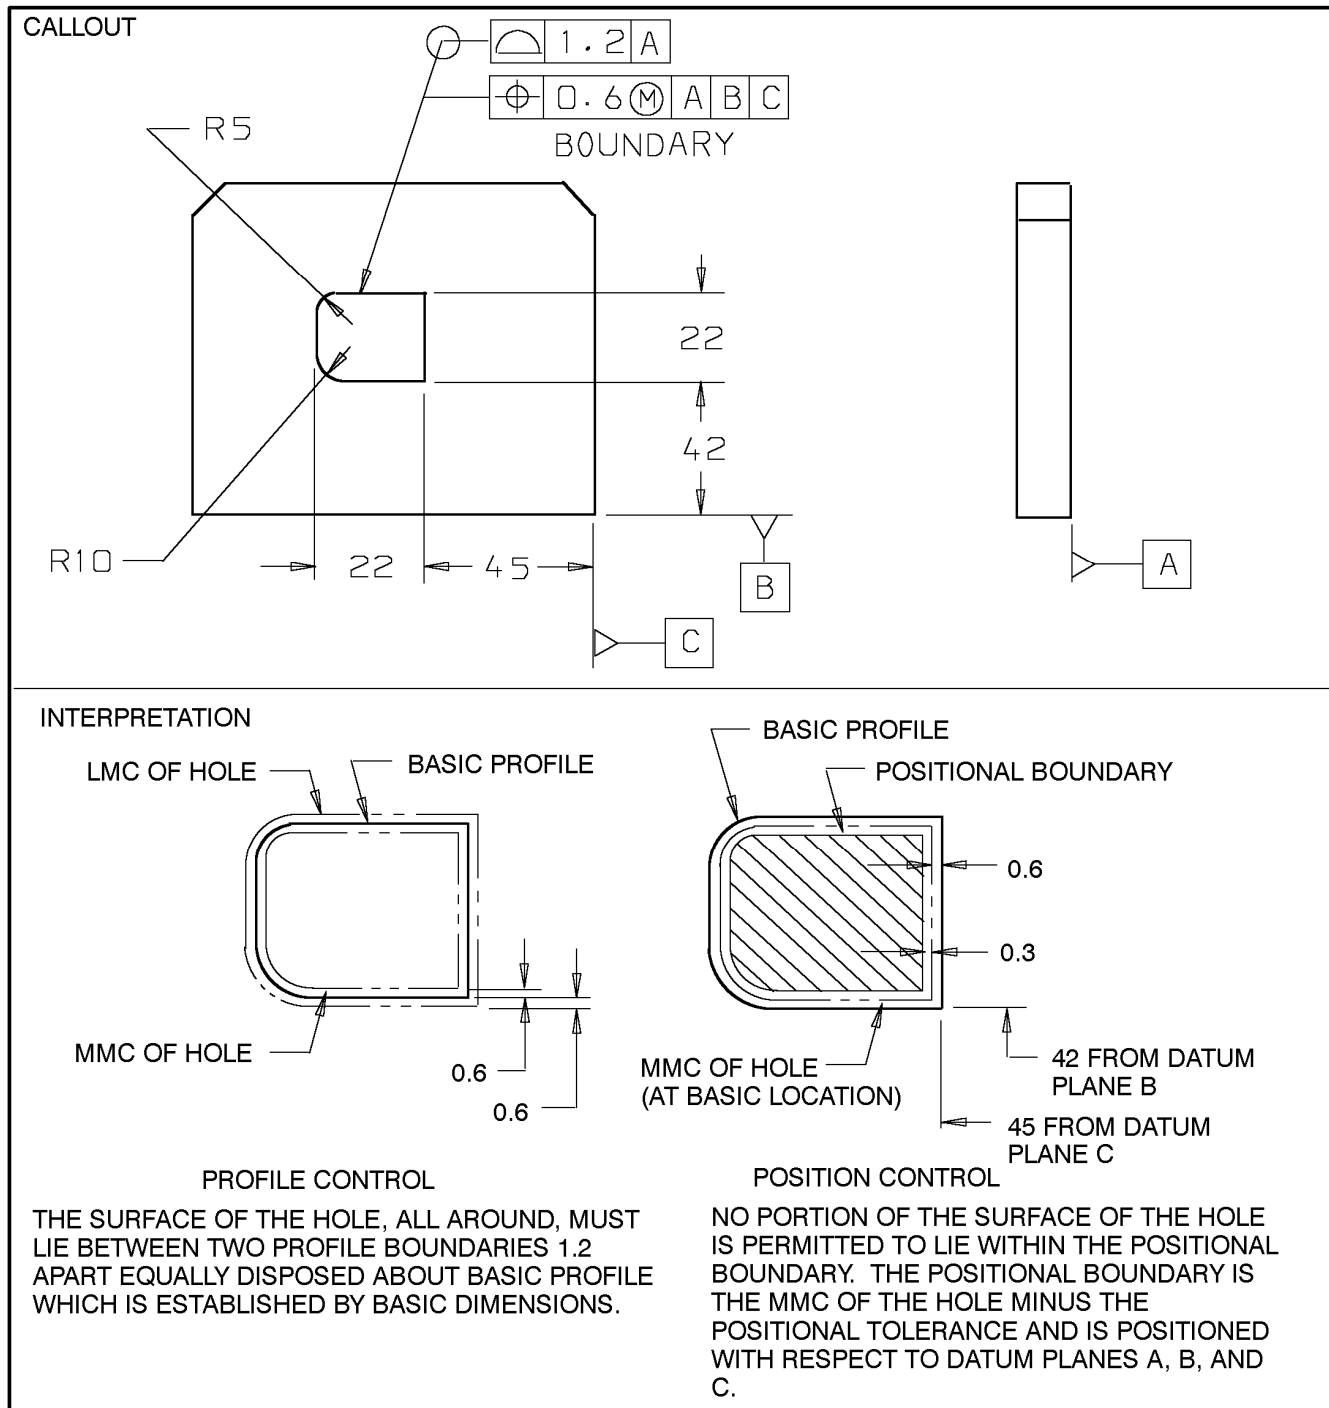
Profile Of A Surface Tolerance Used With Positional Tolerance
